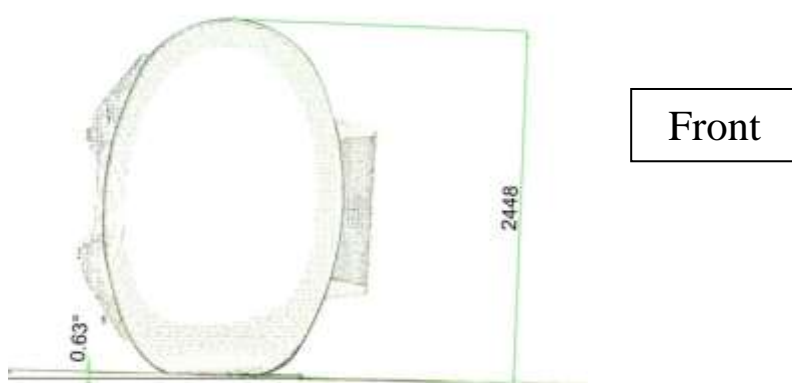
Deformation of GRW tanker J2580 from laser scans after test - front dimensions in mm
